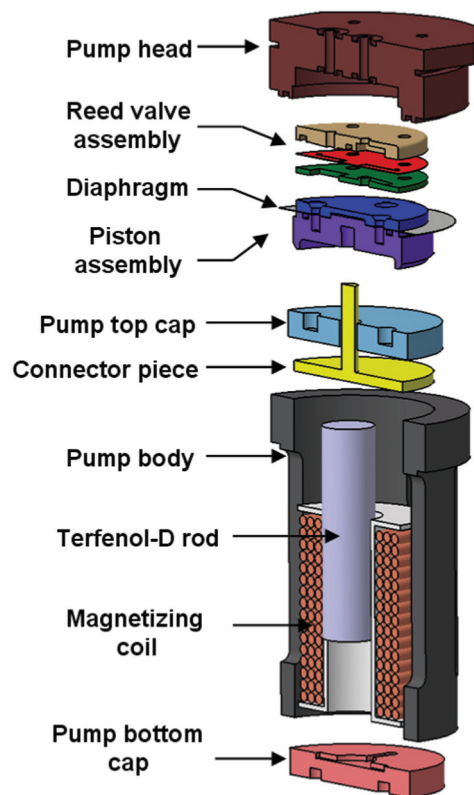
Exploded view of magnetostrictive-based hybrid pumping section.
